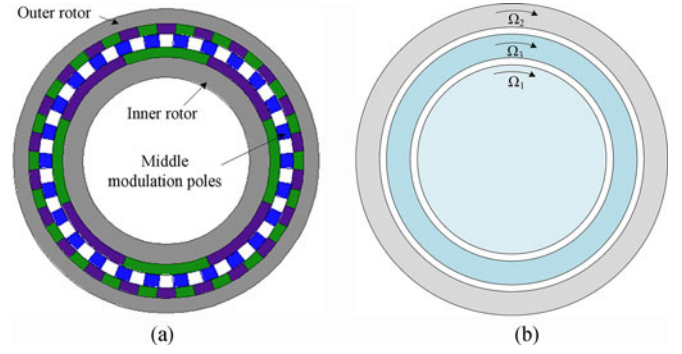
Magnetic gear. (a) Construction. (b) Rotary parts of magnetic gear.
